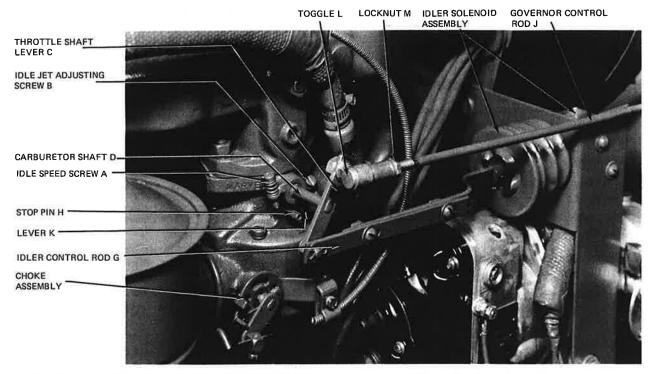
Carburetor Adjustments (Unit shown with Magneto Ignition).
